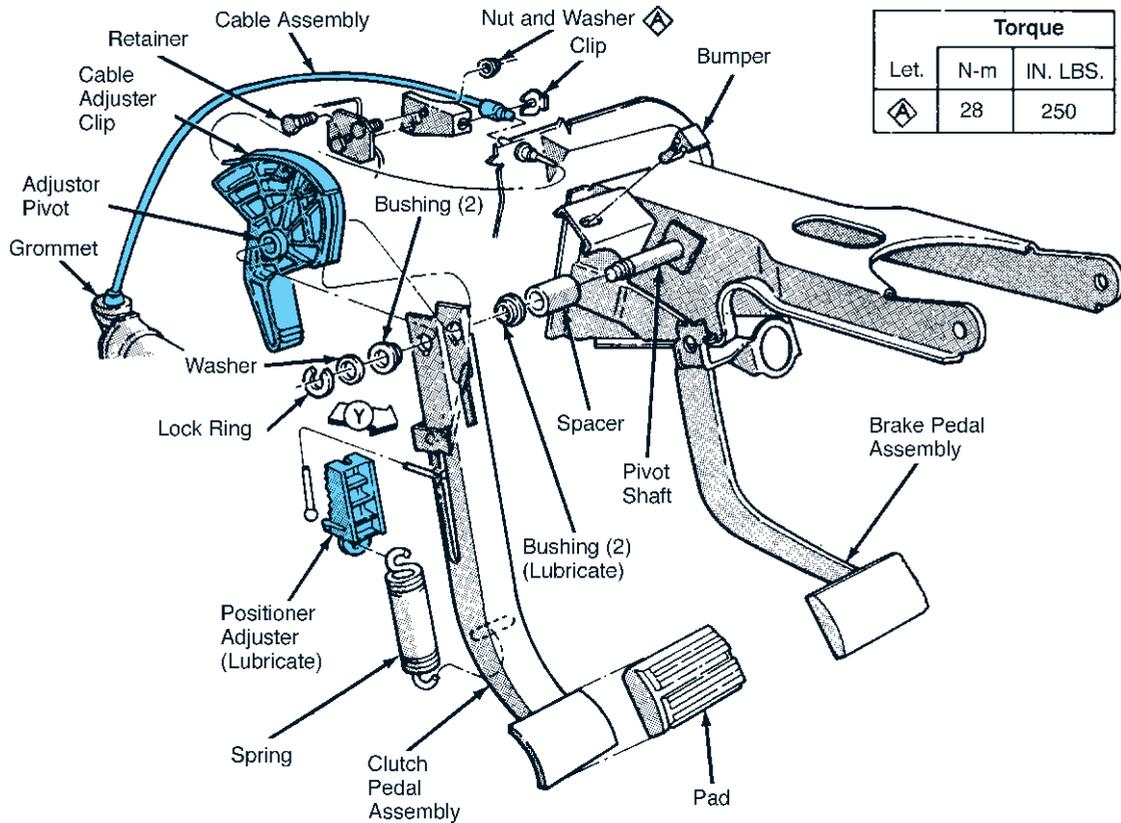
With a self-adjusting clutch, check the cable, cable adjuster clip (cam), and positioner adjuster for proper operation. (Courtesy of DaimlerChrysler Corporation)
